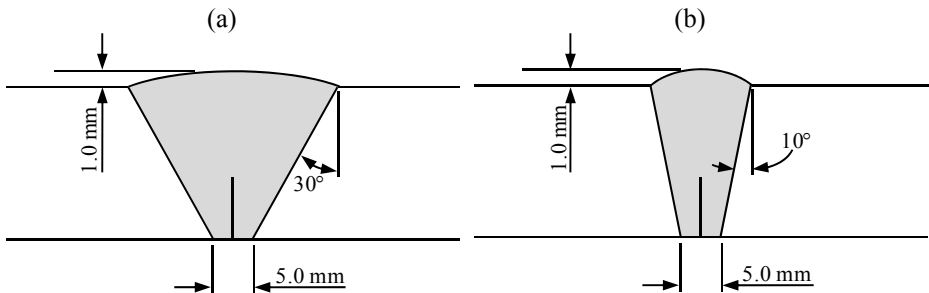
Investigated weld bevel geometries: wide V-shaped bevel (a) and narrow gap bevel (b)
